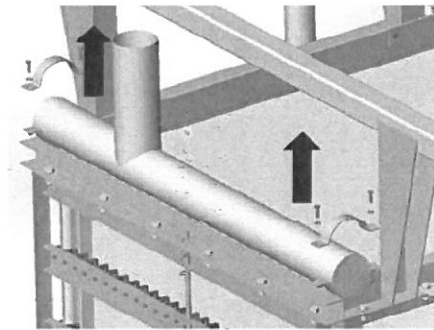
Remove the 10 bolts circled in red and the 10 bolts on hidden faces (not shown)
